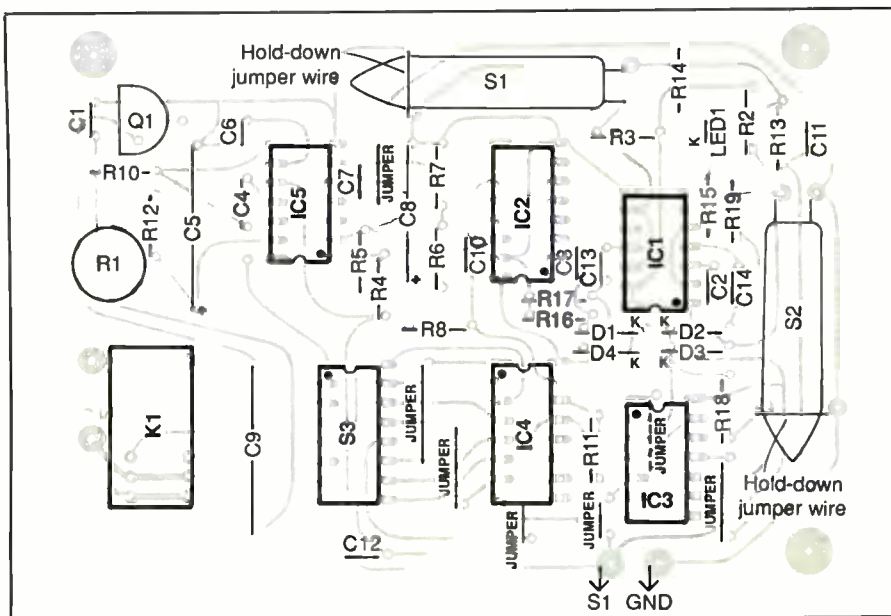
Wiring guide for pc board. Use this as a rough guide component layout if you point-to-point wire the circuit.
